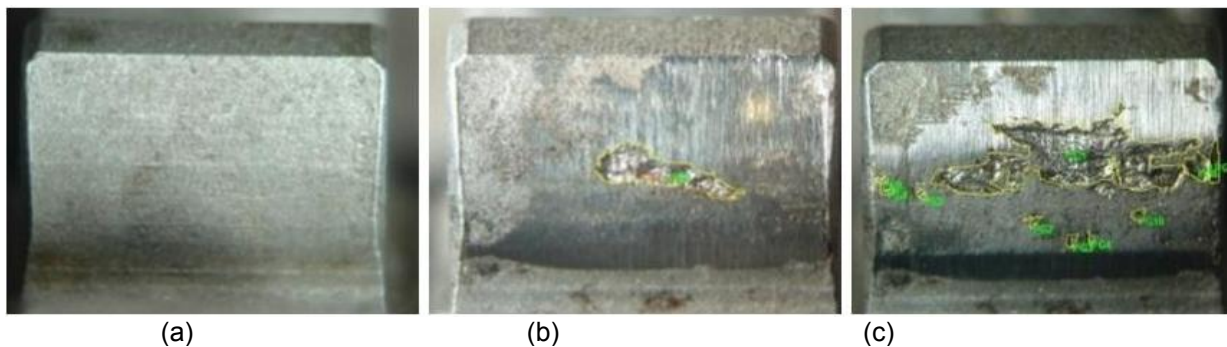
Evolution of damage to a tooth of a machined gear. (a) as received, (b) after 4th pitting step and (c) after 5th pitting step.
